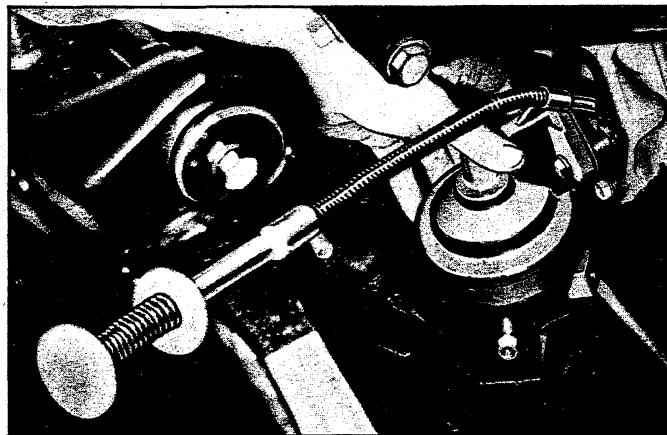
P—Installing 283, 327, 350 V8 Engine Fuel Pump
